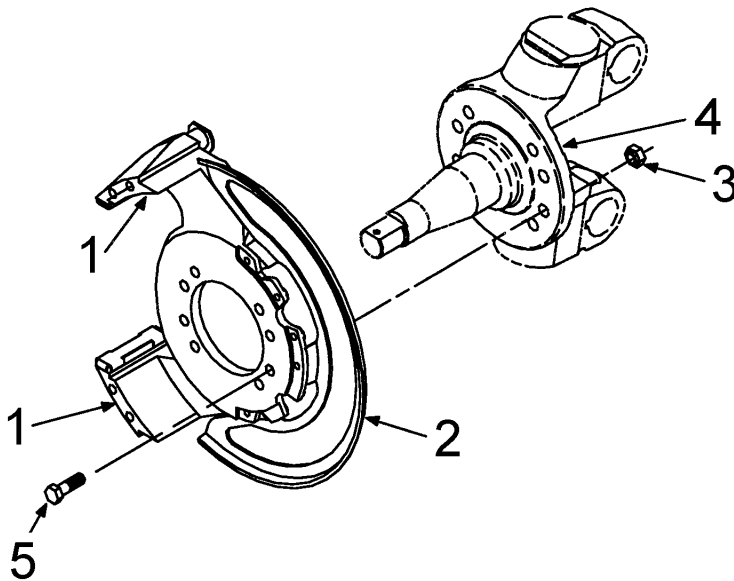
Install Anchor Plate and Splash Shield Assembly on Front Axle
